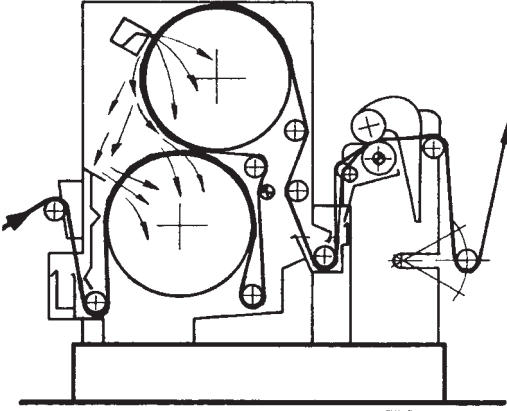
Rotojet drum-type open-width washing machine (Küsters).
